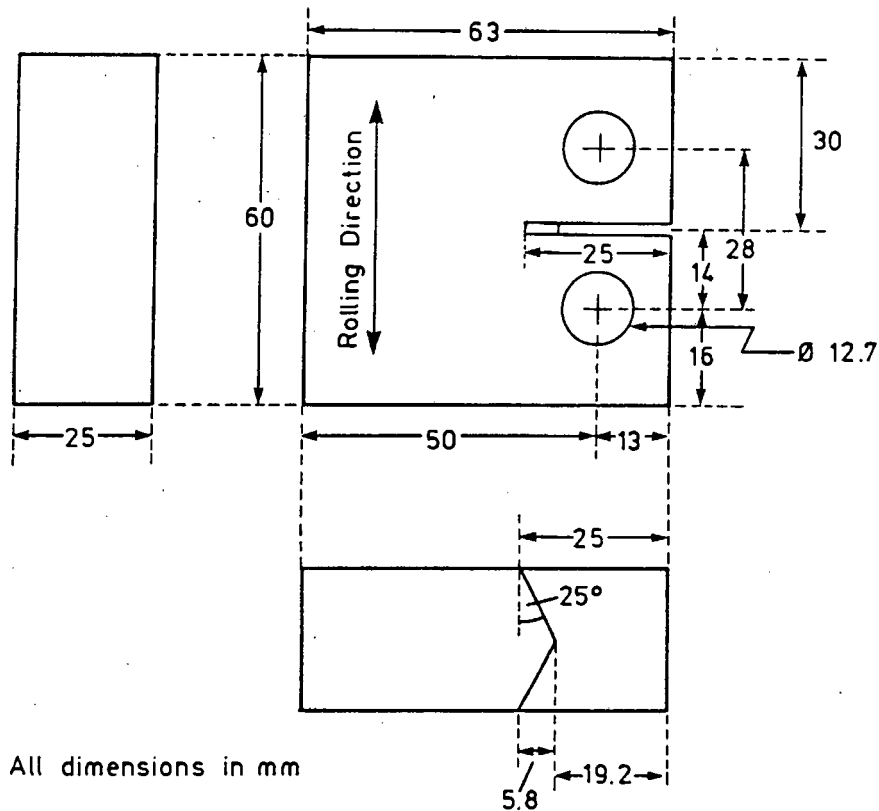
A schematic of the compact tension specimen geometry and dimensions.
